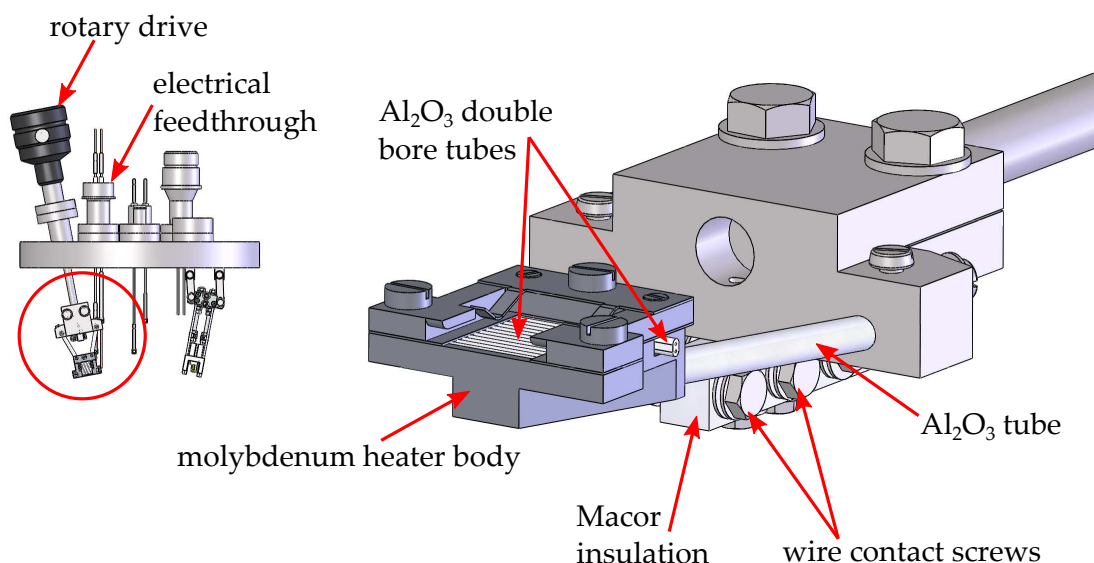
Left: top view of the flange assembly for the sample heaters. Right: 3D model view of the resistive heater under the ion source.
